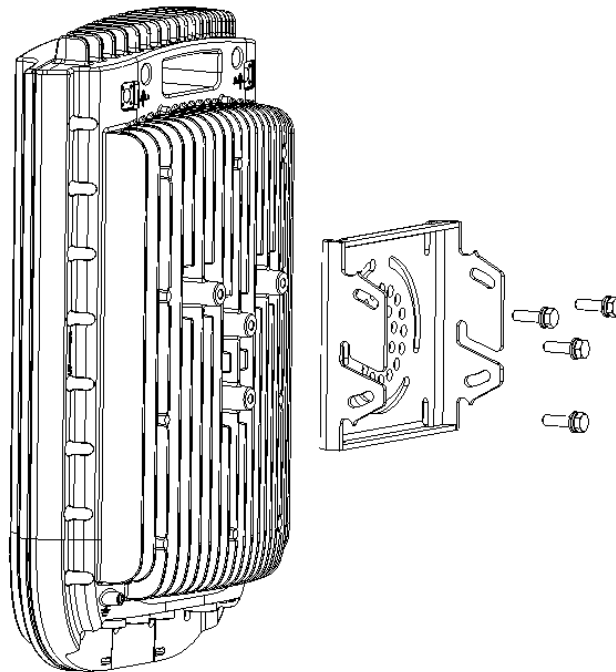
Assembling the Tilt Extension Bracket on BTS
